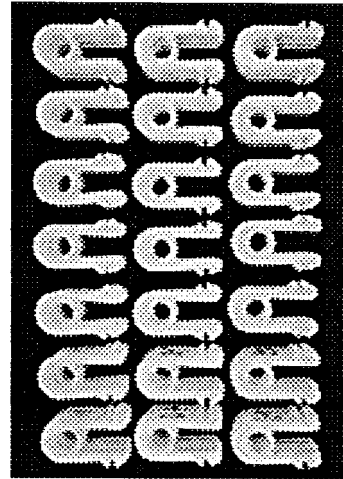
Batch of products manufactured by injection molding in cast epoxy dies
